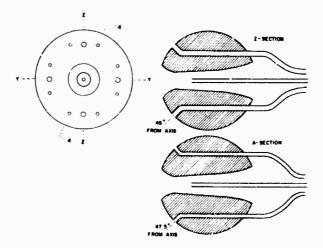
Front and cross-section views of anemoclinometer head, with y- and z-coordinates shown on front view.
